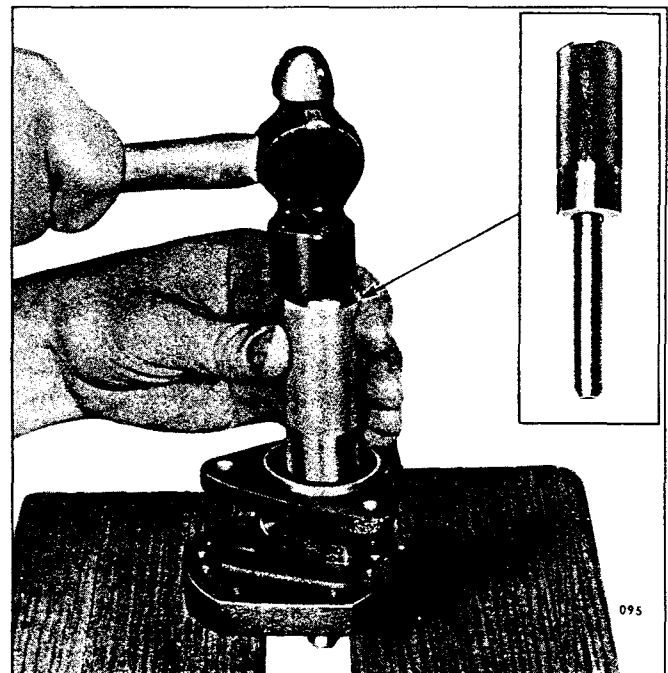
Installing Inner Oil Seal Using Tool J 1508-8
